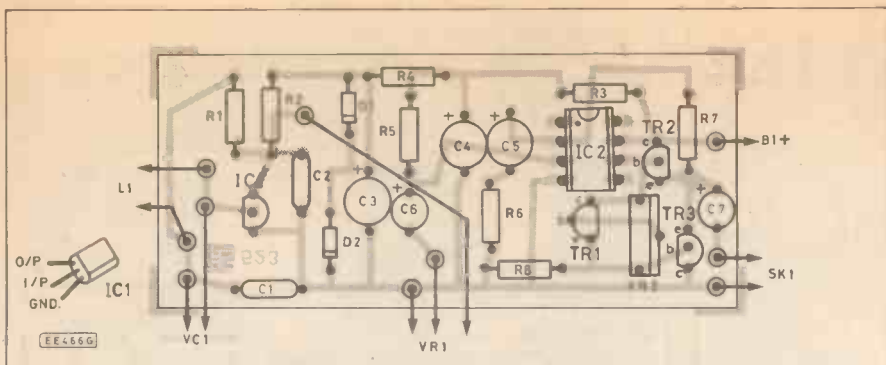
Component layout and full size printed circuit board master. This board is available from the EE PCB Service: code EE526.
